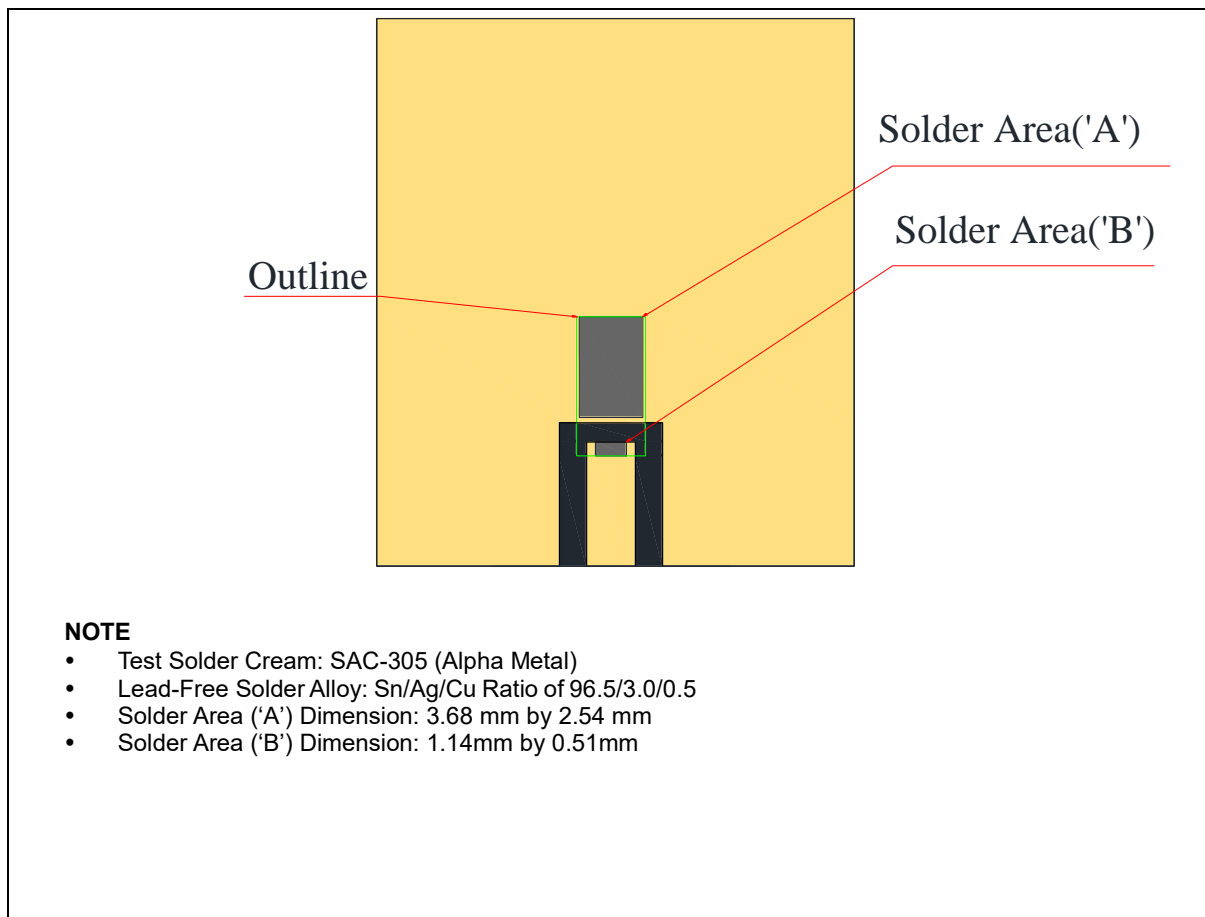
Recommended PCB Layout and Solder Mask Pattern
